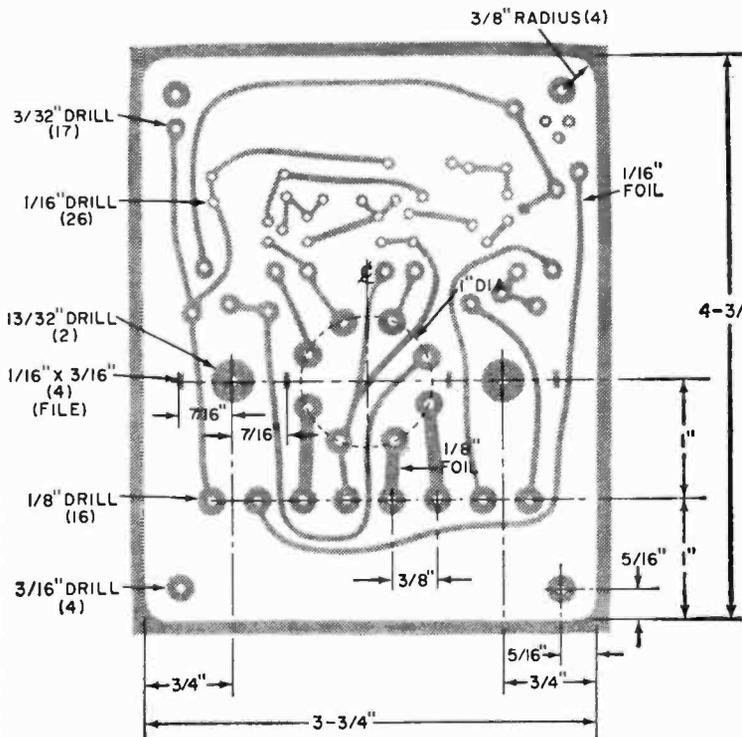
A printed circuit board can be etched following the outlines shown in this drawing. Use of this outline should be predicated on the physical size of capacitor C1, location of the terminals for the octal socket to hold K1, and whether or not the builder uses twist-tab potentiometers for R11 and R12. Point-to-point wiring can be used in place of a printed circuit without encountering any problems.
